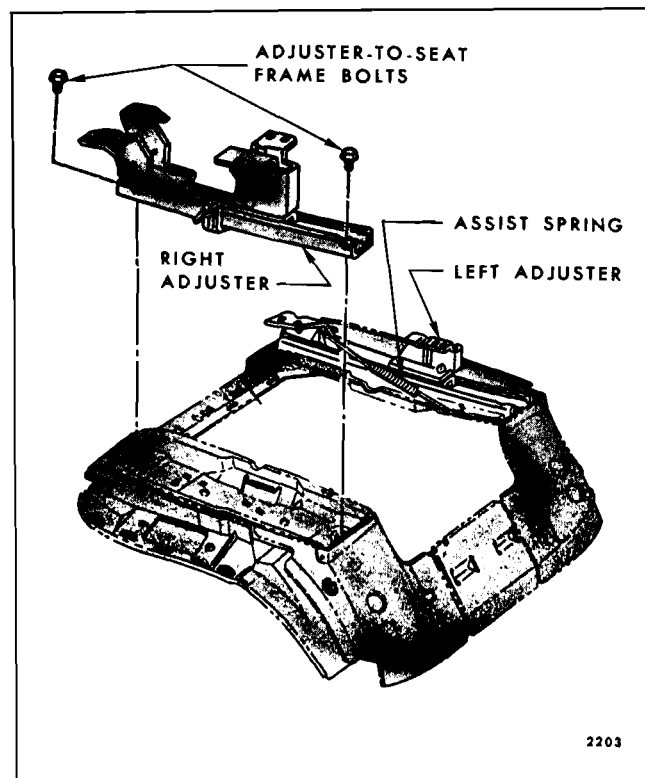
Manual Bucket Seat Adjuster Removal
